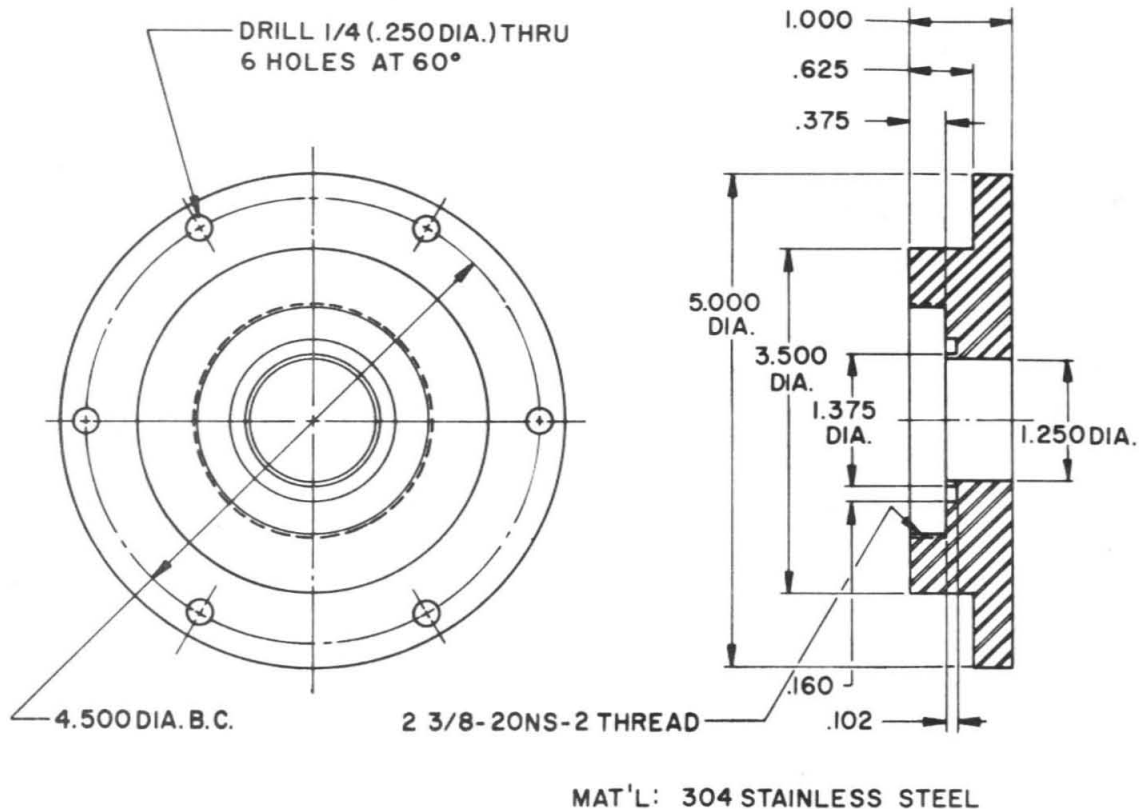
Drawing showing vacuum tank optical window housing. Dimensions are in inches.
